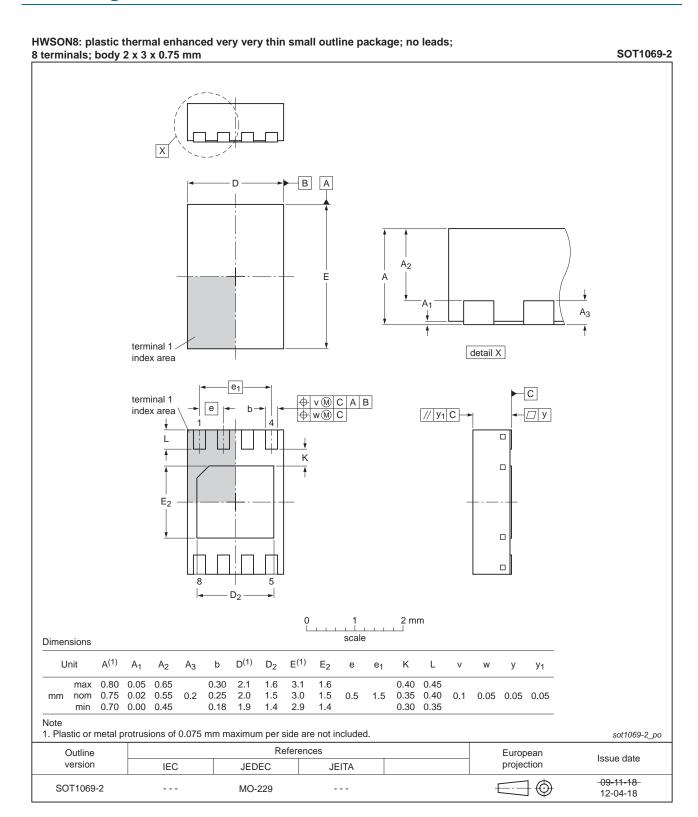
Package outline SOT1069-2 (HWSON8) of PCF85063TP
